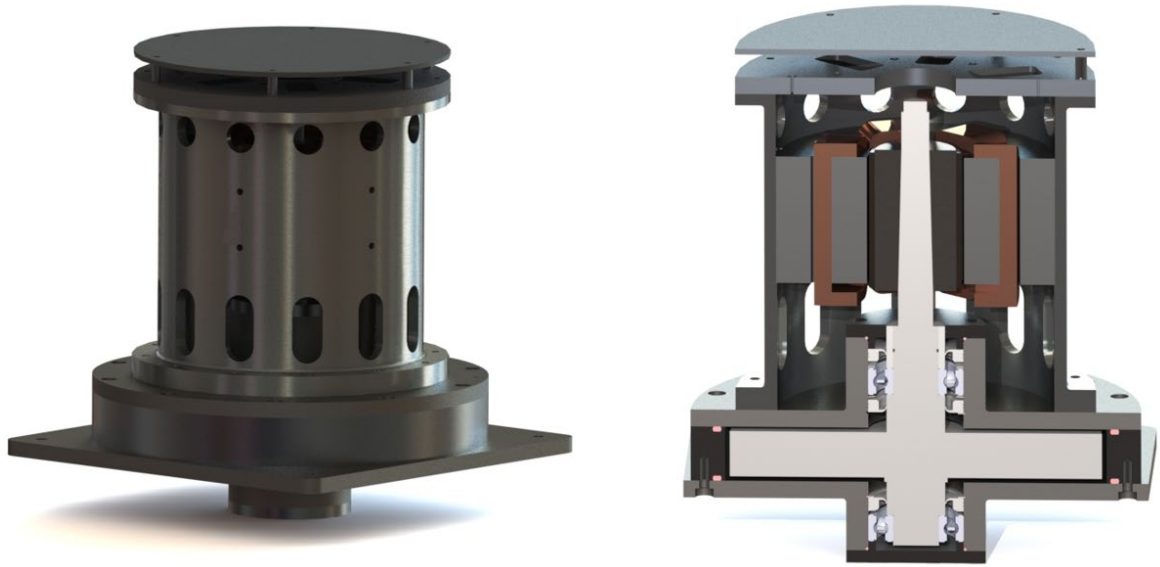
INSTAR Flywheel and Flywheel Cross Section [22].
